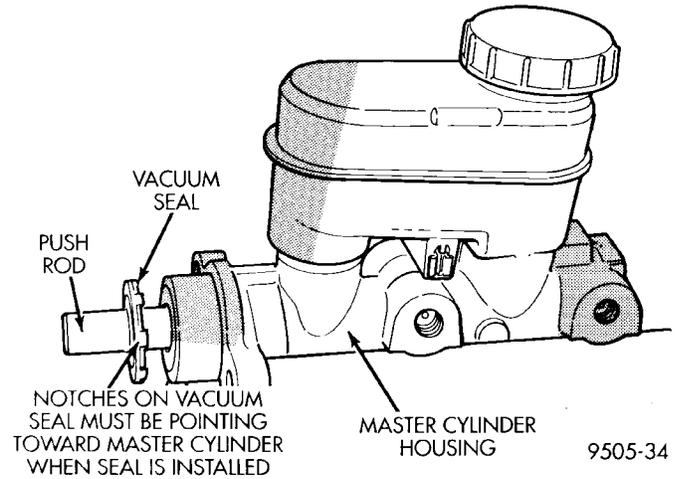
Installing Vacuum Seal On Master Cylinder Push Rod
